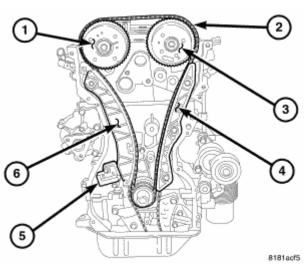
TIMING DRIVE Courtesy of CHRYSLER LLC
